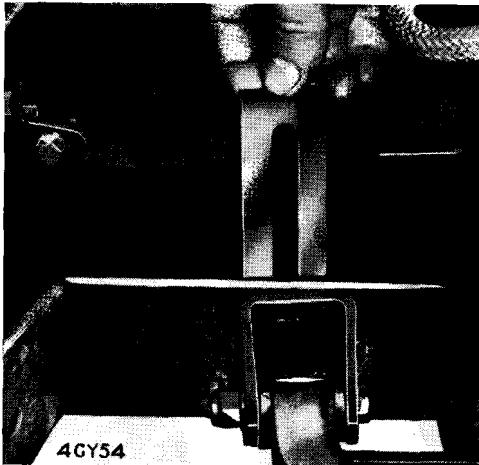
Fitting shims between lower fulcrum bracket and chassis frame
